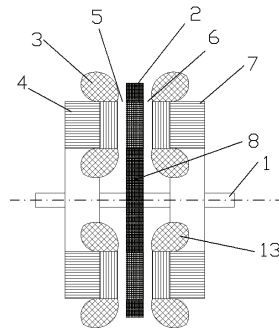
AF induction motor in which there is a shaft (1) rotating with respect to the machine frame, and a rotor (2) supported to the shaft. On the first side of the rotor (2) there is a stator (4) supported to the machine frame and comprising a stator winding (3). There is the element (7) to conduct the magnetic flux instead is a construction corresponding to the stator (4), comprising the stator windings (13). There is a small air-gap (5) between the rotor (2) and the stator (4), and the corresponding air-gap (6) on the other side of the rotor. The rotor frame plate (8) is machined of work-hardened, rolled sheet of suitable aluminium alloy.
